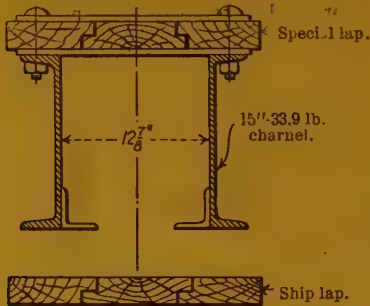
Section of center sill at drop door opening, illustrating method of securing longitudinal floor boards by means of traps and special board construction. The necessity of applying bolts between center sill channels is overcome.
